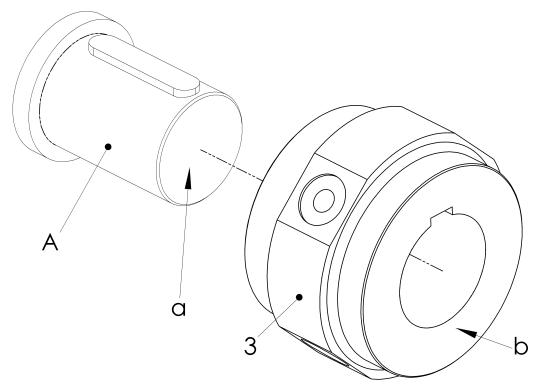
Mounting the hub for link (3) with cylindrical bore and keyway
